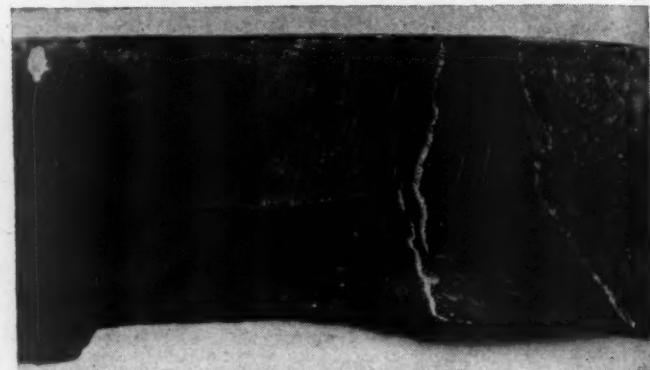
Close up of interior of rivet hole, showing tool marks left by reamer—Fatigue cracks originated in these stress raisers and the failure was due to fatigue crack and blue-brittle fracture
